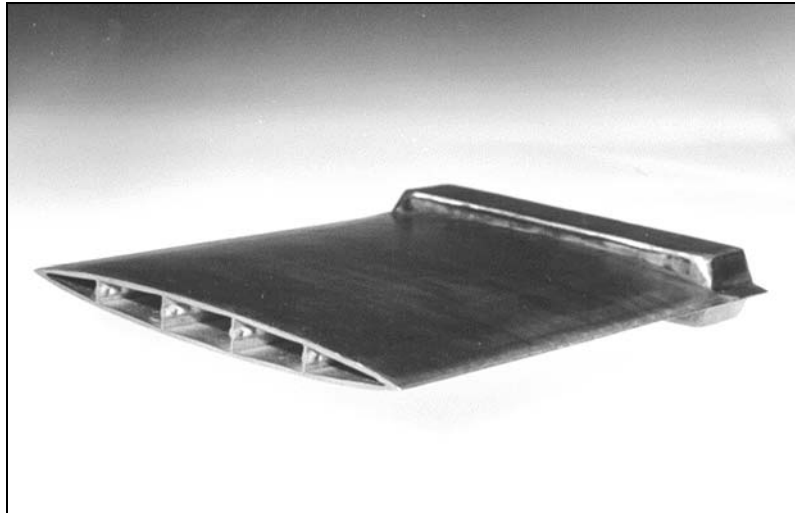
Model of the hollow blade of a gas-turbine engine fabricated by the integrated technology of welding by pressure with superplastic molding from the VT6 alloy at the temperature that did not exceed $T = 800^{\circ}\text{C}$.
